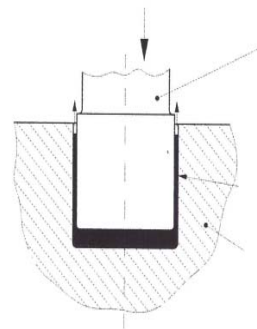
Manufacturing the part "Tube" by reverse extrusion
